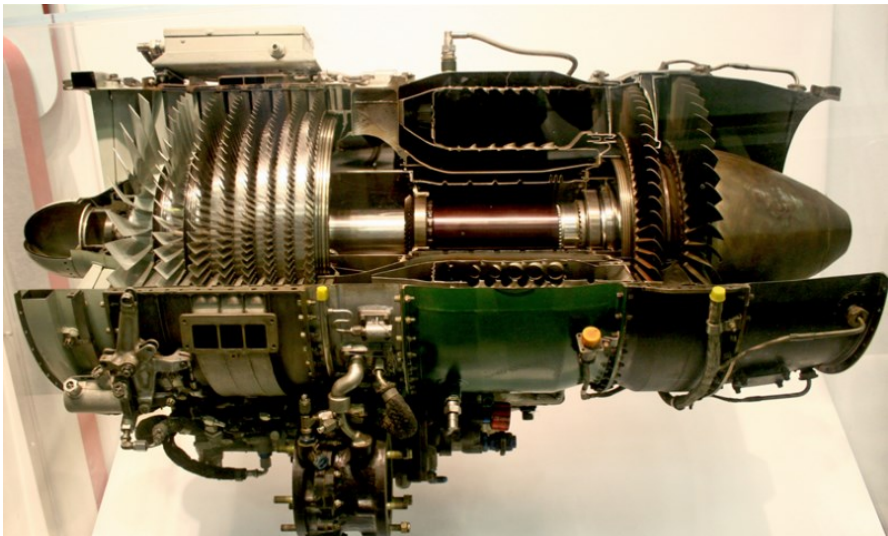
Gas turbine with axial compressor and turbine unit – cross section
